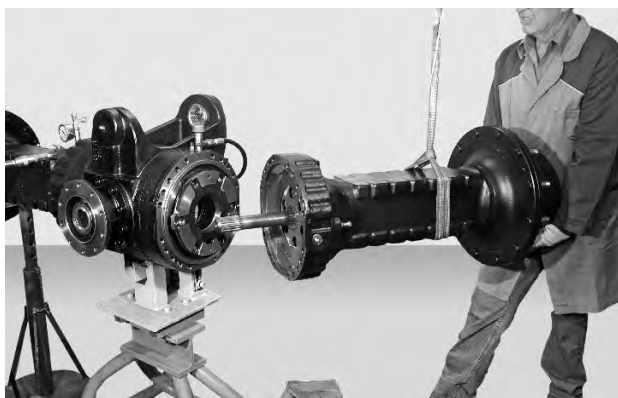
Check integrity and position of the arm's o-ring; install the complete arm.
